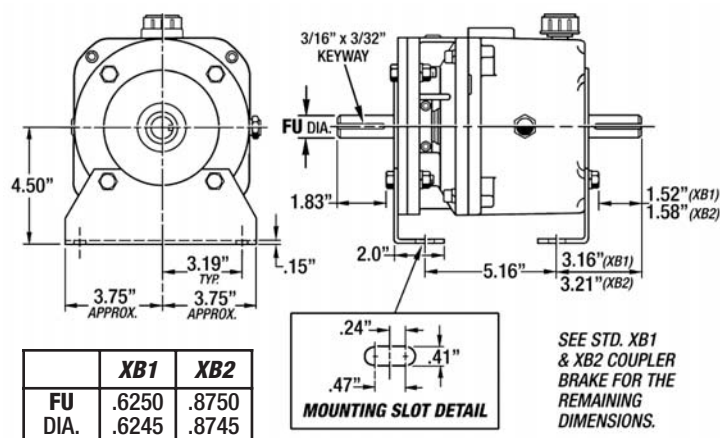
XB1 and XB2 Coupler Brake Dimensions
